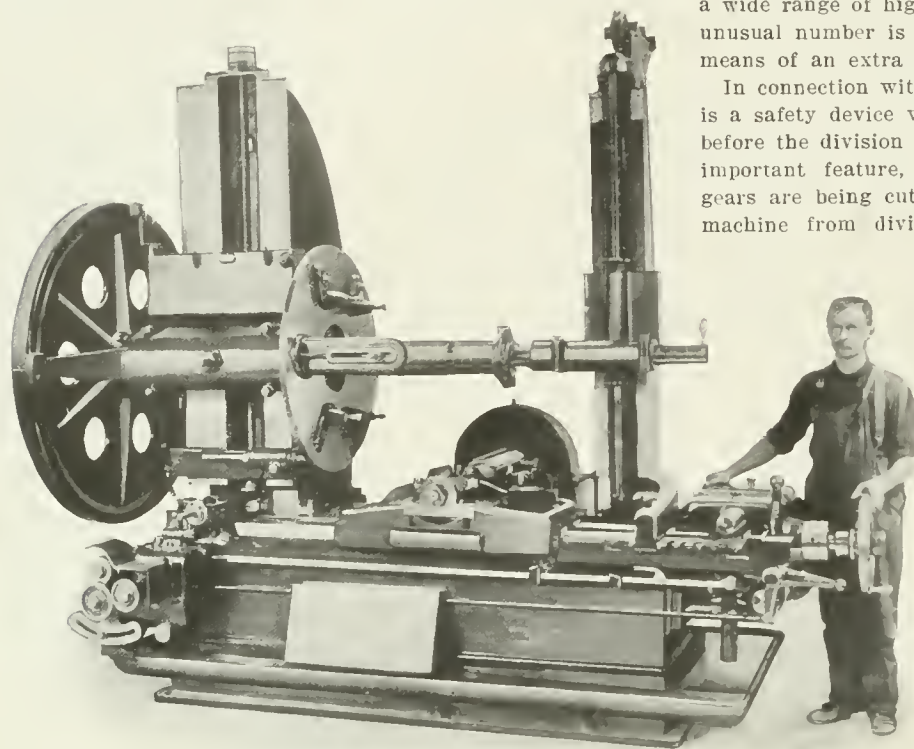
84 by 24-inch Automatic Spur-gear Cutting Machine built by the Newark Gear Cutting Machine Co.
